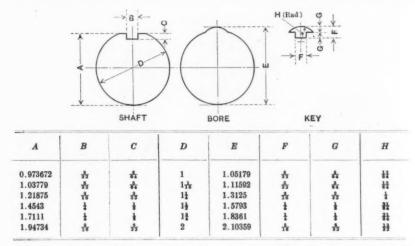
Shape and Dimensions of Keys used for Milling-Cutter Arbors
